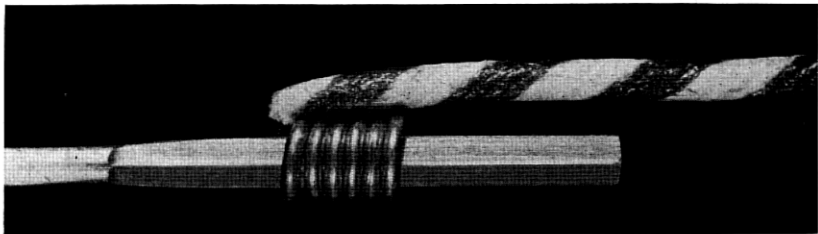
A solderless wrapped connection on a wire spring terminal.
